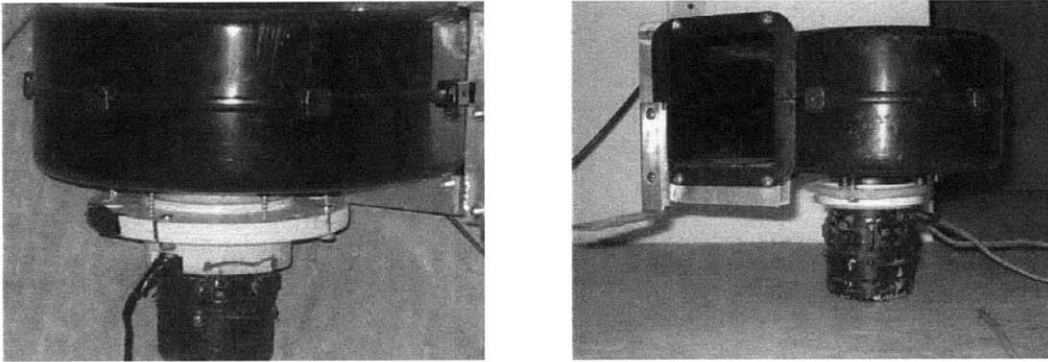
This figure shows two different designs used to mount the motor into the blower housing. The design on the left shows the initial design that was used for the first motor. Because the second motor was being placed in an even smaller space a second-generation design was made that would do just a good of job of holding the motor while taking up a considerably smaller amount of space.
